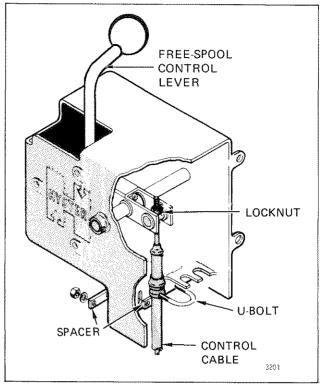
FREE-SPOOL CONTROL ASSEMBLY, DIRECT DRIVE WINCH
